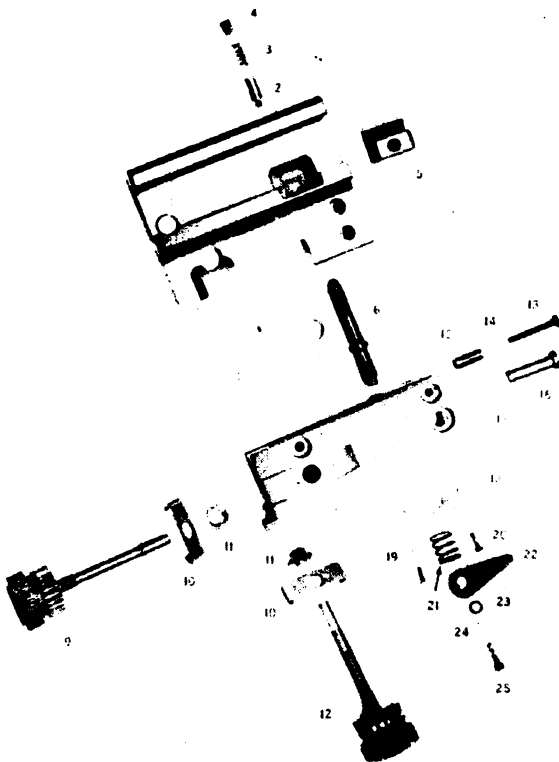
①. Sight, exploded view (part 1 of 2).
